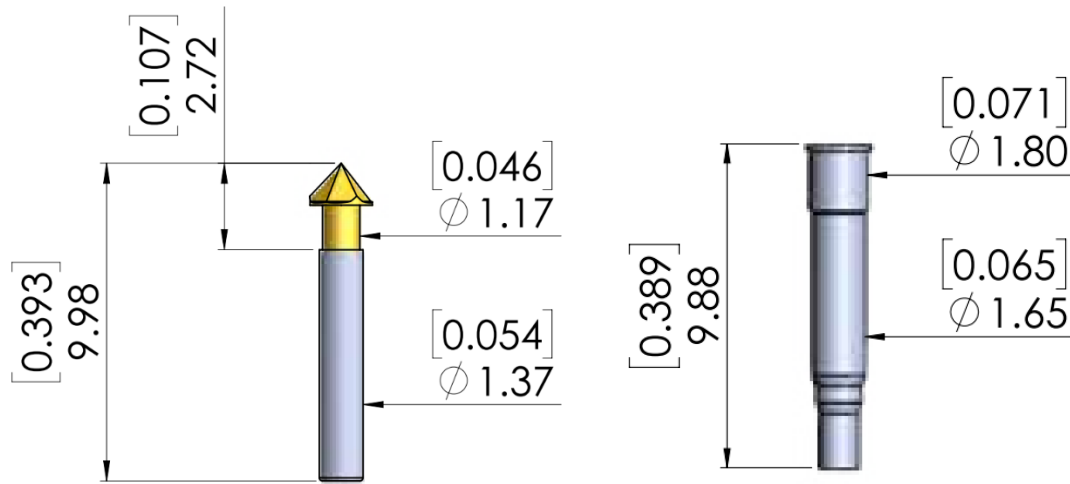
Equip-test test probe set, BP1000-EM (left), RCP065U (right) [24].
